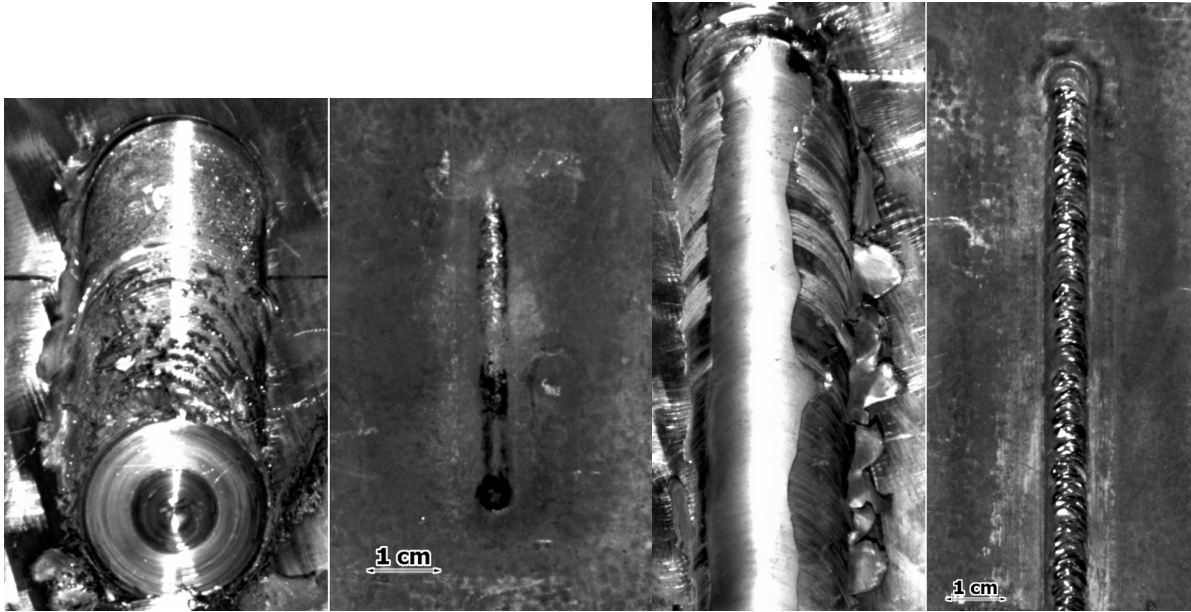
Top and bottom surfaces of FSW passes 1 and 2 on ODS-Eurofer in the as-received condition.
